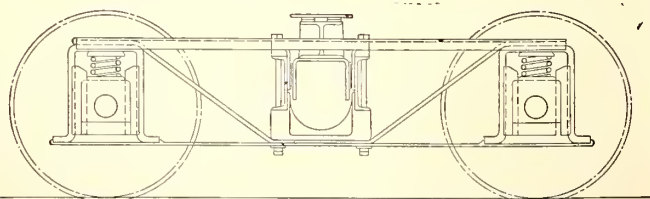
HIGH-SPEED DESIGN HAVING SPRINGS OVER BOXES INSTEAD OF EQUALIZER BARS
